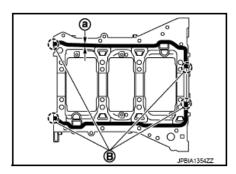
Identifying Liquid Gasket Applying Dimension Of Lower Cylinder Block Courtesy of NISSAN MOTOR CO., U.S.A.
